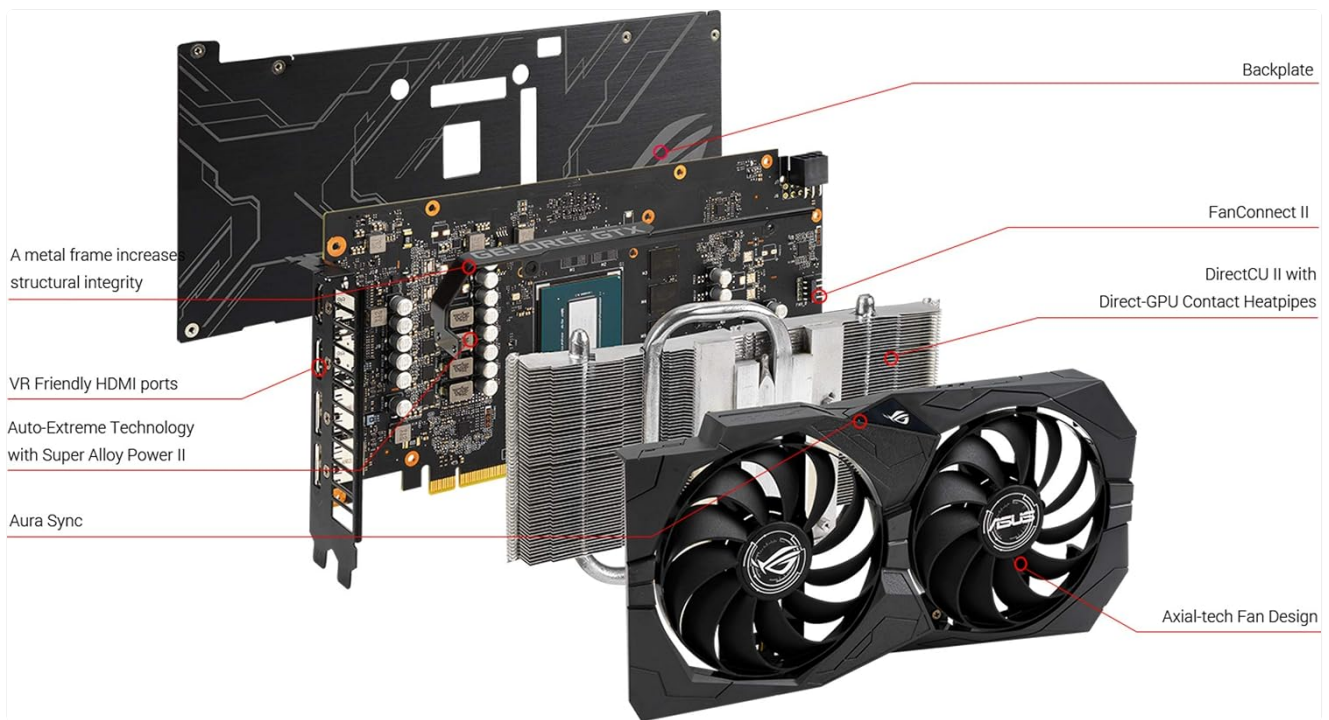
Exploded view illustrating key components such as the backplate, DirectCU II cooler, Axial-tech fans, and power delivery system.
